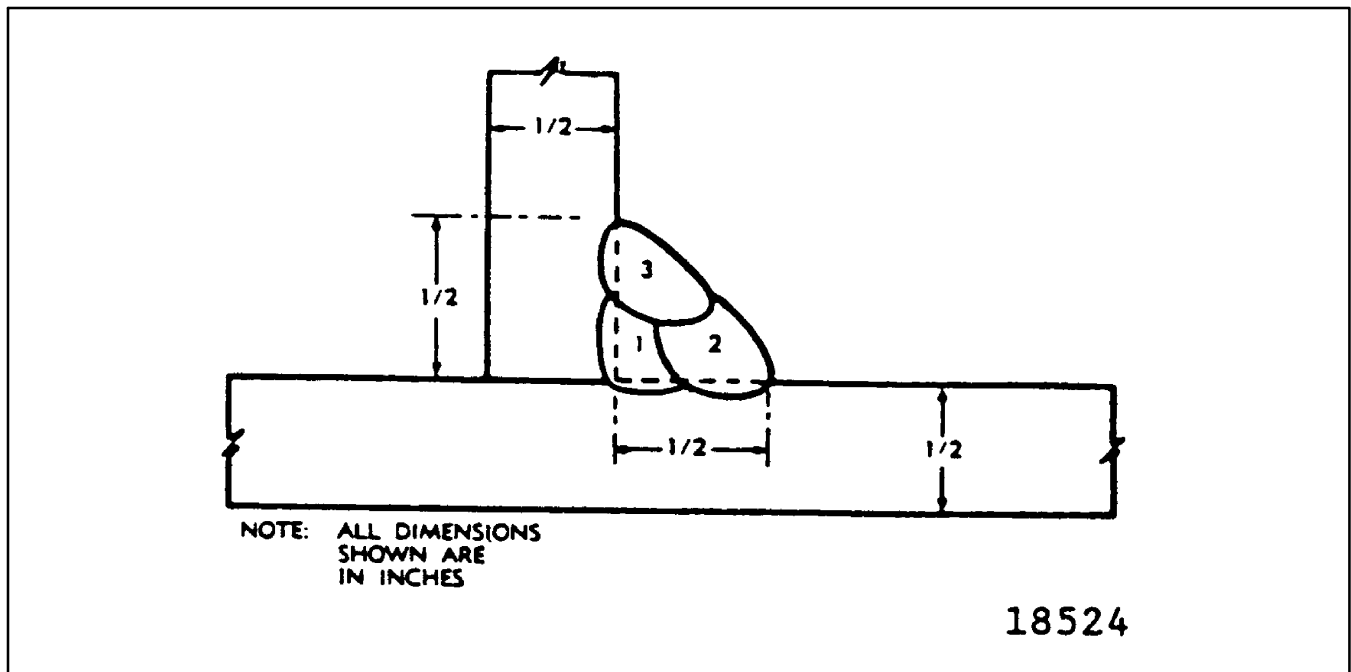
Fillet Welded Tee Joint on Heavy Plate
